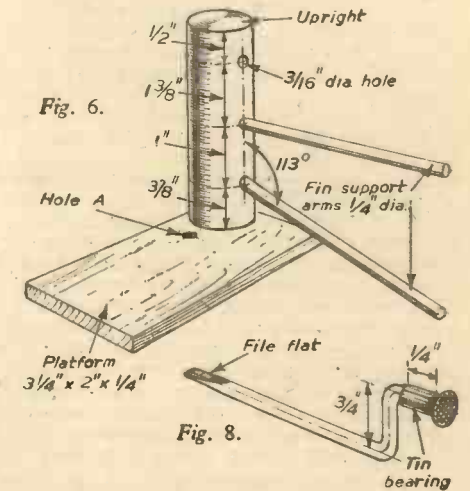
The assembly in position. Fig. 8.—Detail of the crank.
